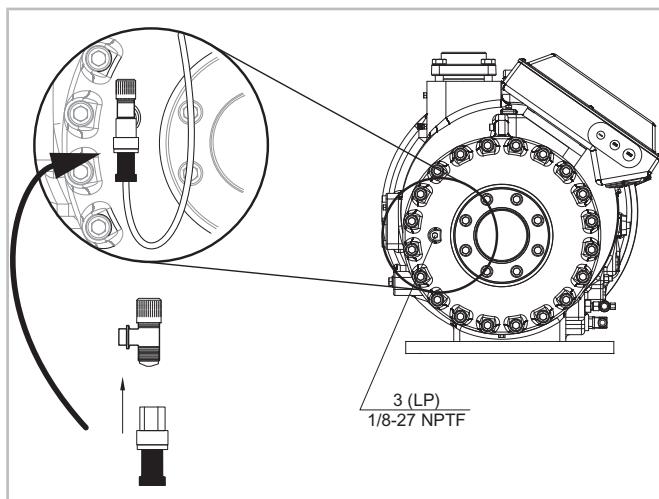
CS.95 compressor: Mounting of the low pressure transmitter
